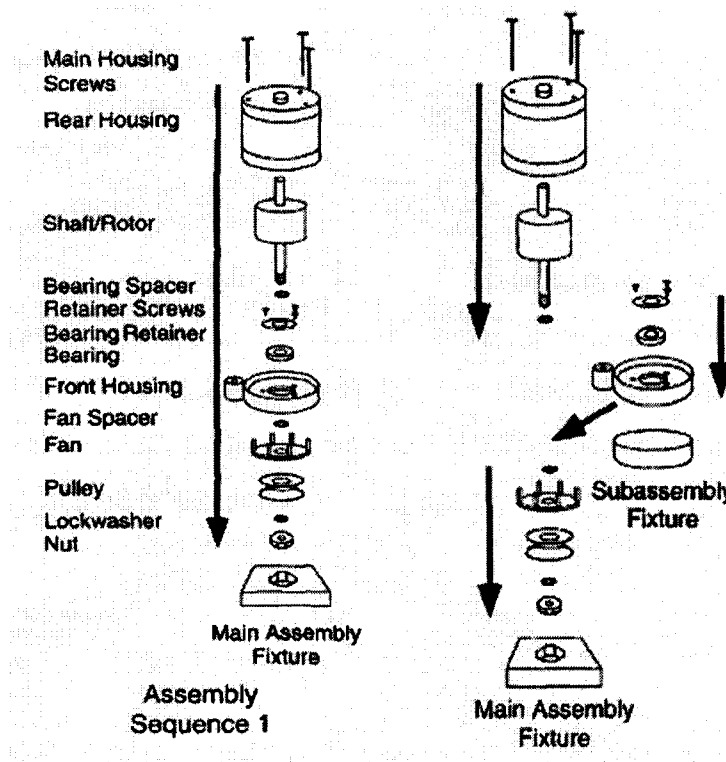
An example of assembly sequence without subassembly (left hand side sequence) and with assembly (right hand side sequence)
